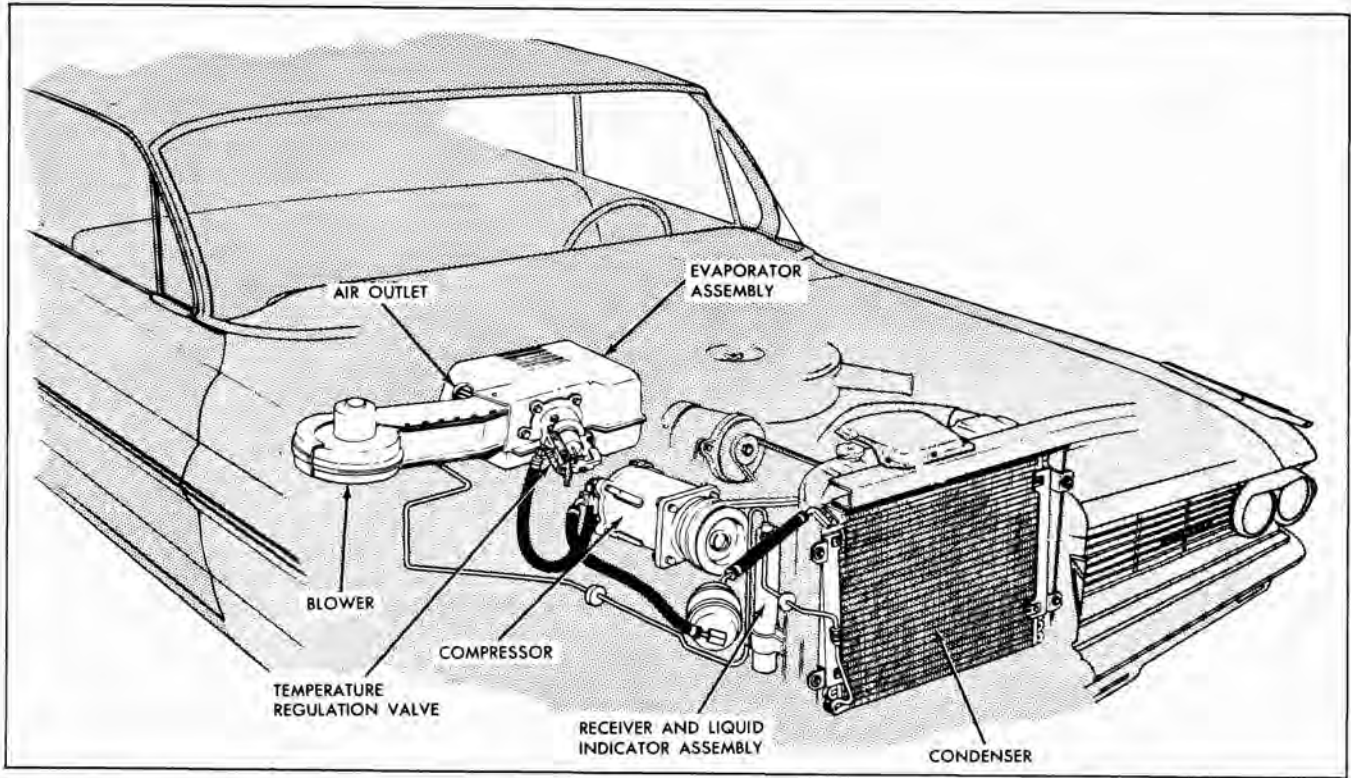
Location of Units in the Pontiac Cool Pack Conditioner System
